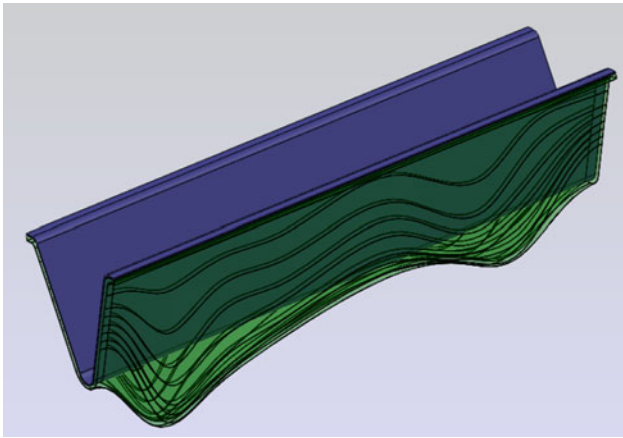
A schematic drawing shows stacking the pre-bent V groove on top of the saddle-contour die cavity
